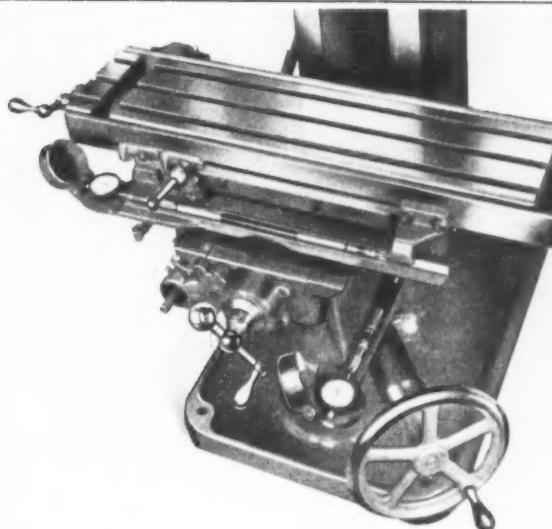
Close-up View, Showing Precision Gages for Setting Table of Cochrane-Bly Miller-Shaper
